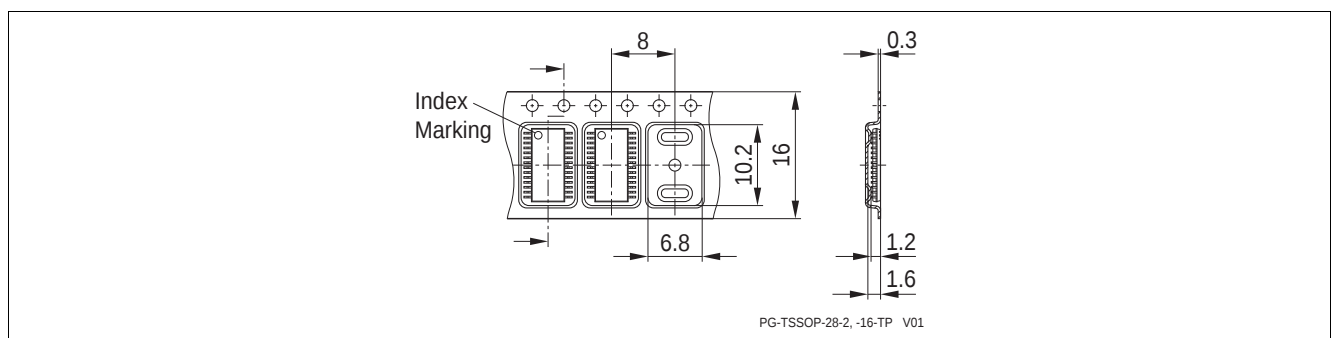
Tape & Reel Dimensions PG-TSSOP-28-2
